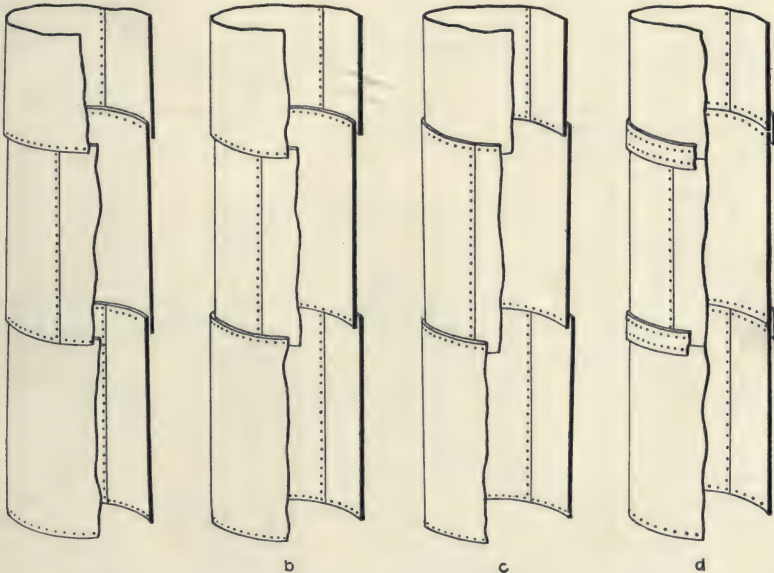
Styles of Joints for Guyed or Supported Steel Stacks.
